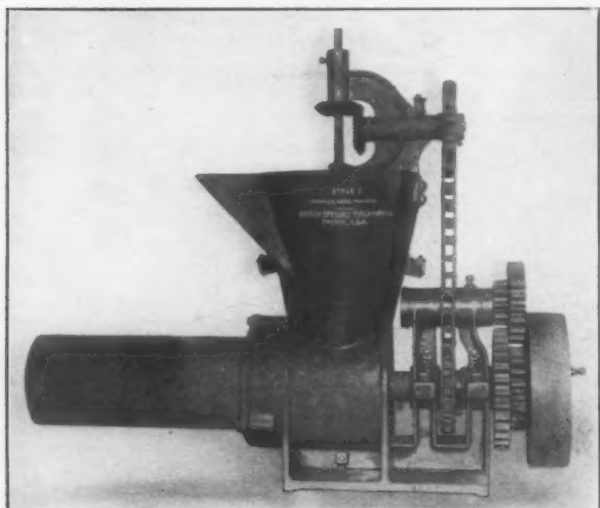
The New Style C Hammer Core Machine Made by the Brown Speciality Machine Company, Chicago, Ill.
